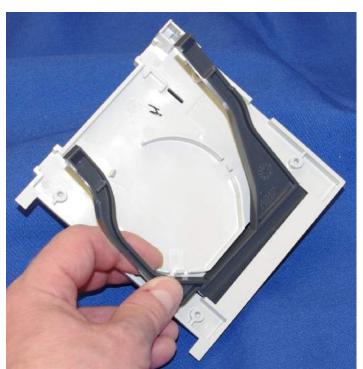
SLIDER DOCKING LATCH INSTALLATION
